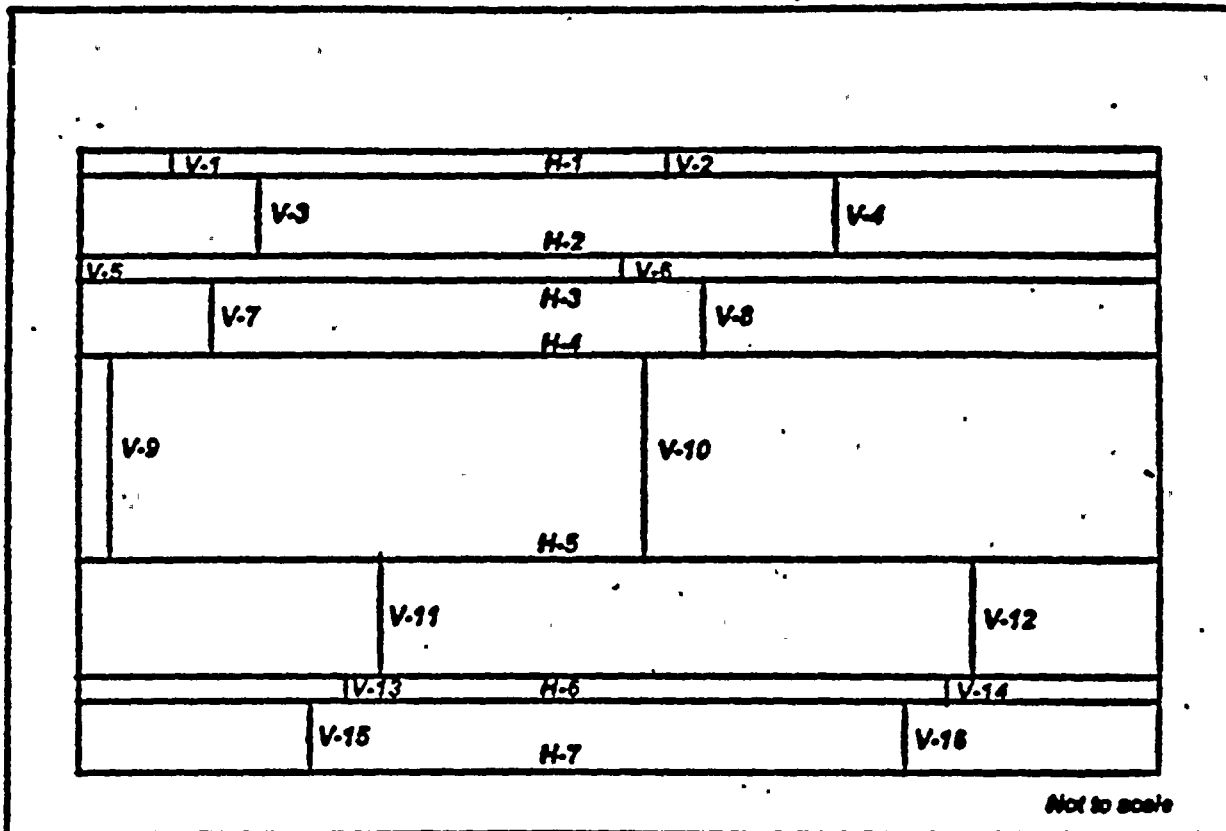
NMP1 Shroud Weld Locations
